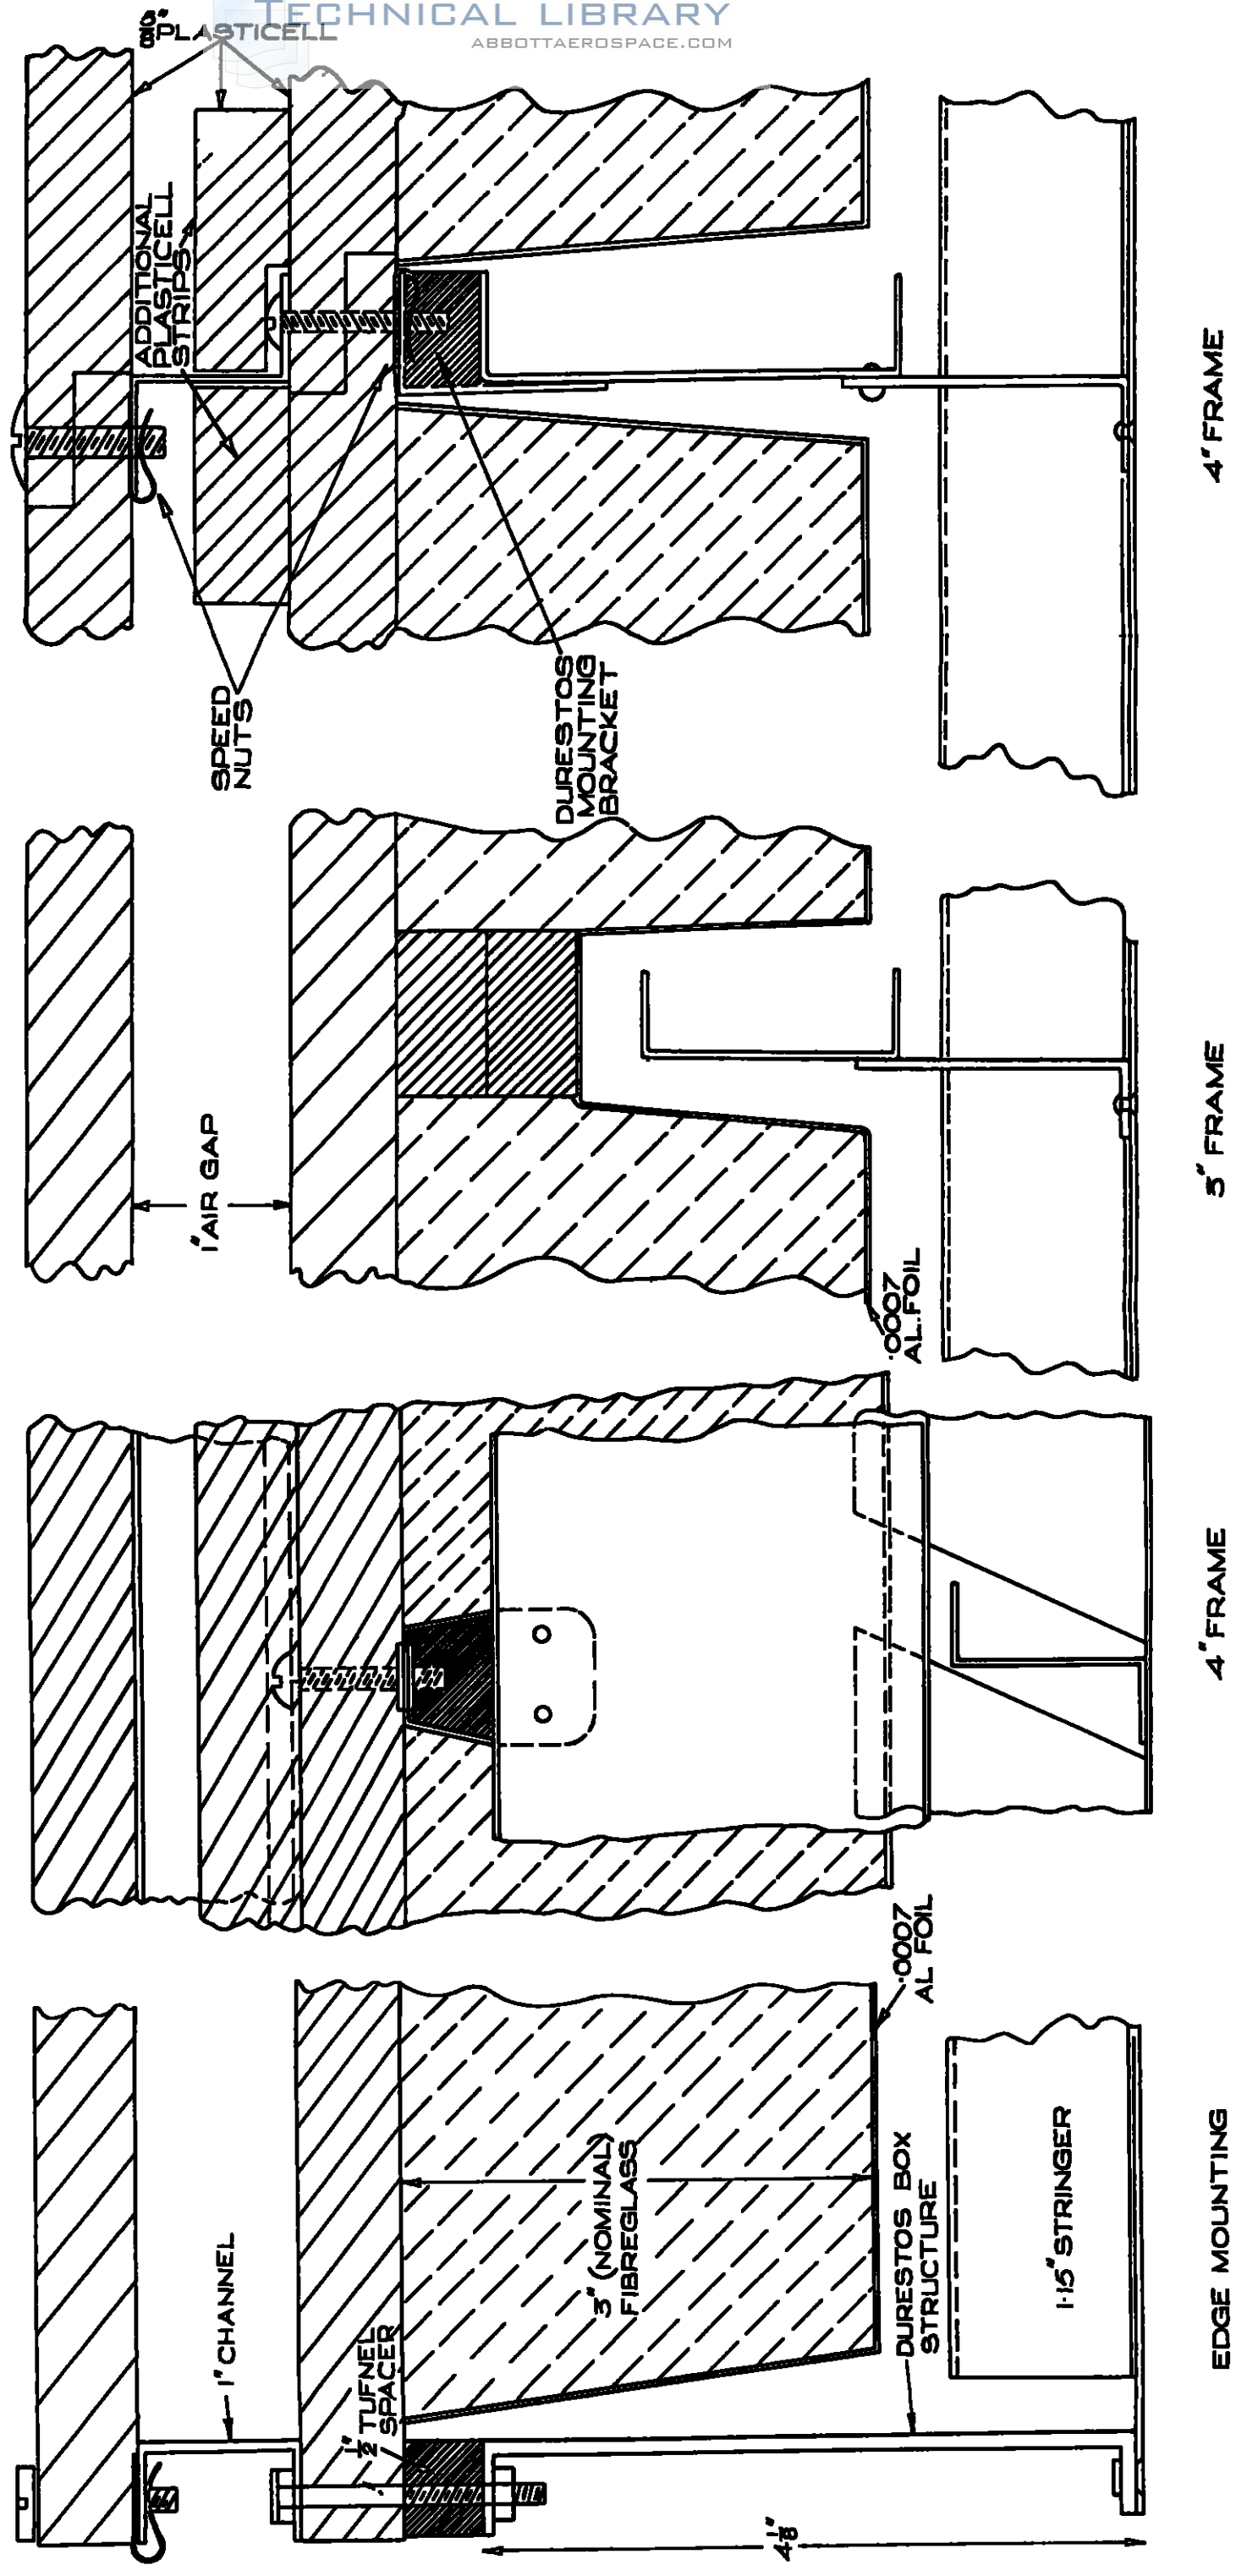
DETAILS OF ATTACHMENT OF INSULATION TO STRUCTURE. PANEL B.198-5.
